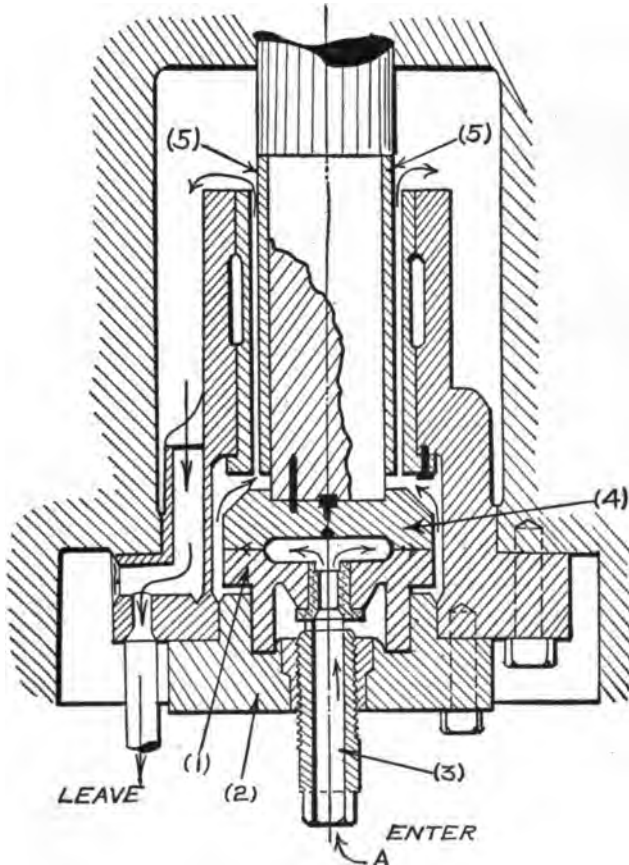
SEC. 10vv.—Sectional view of a vertical turbine step bearing.
